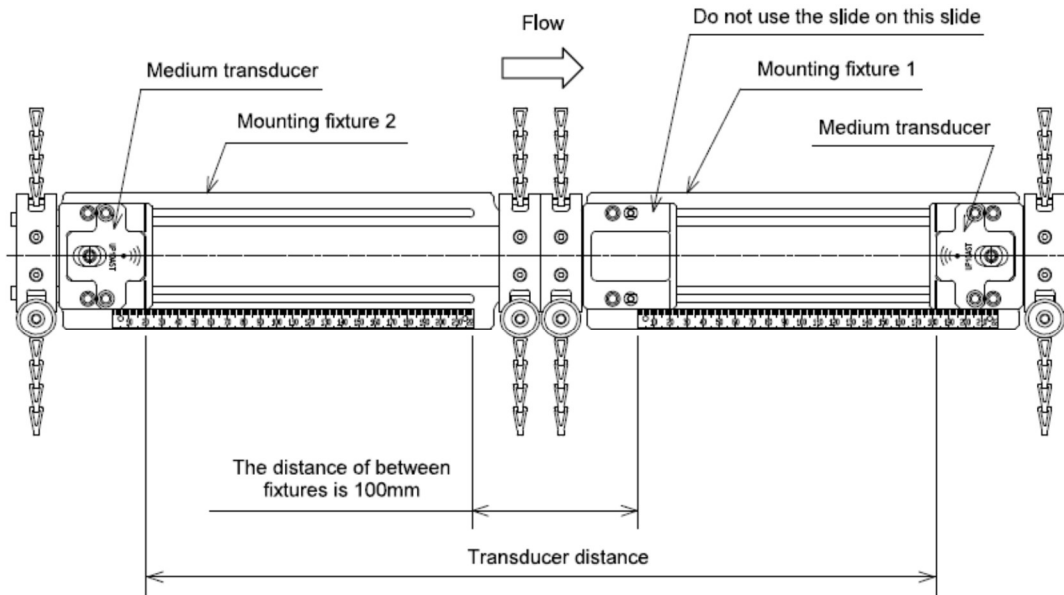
Combine mounting fixture (over DN200mm)
